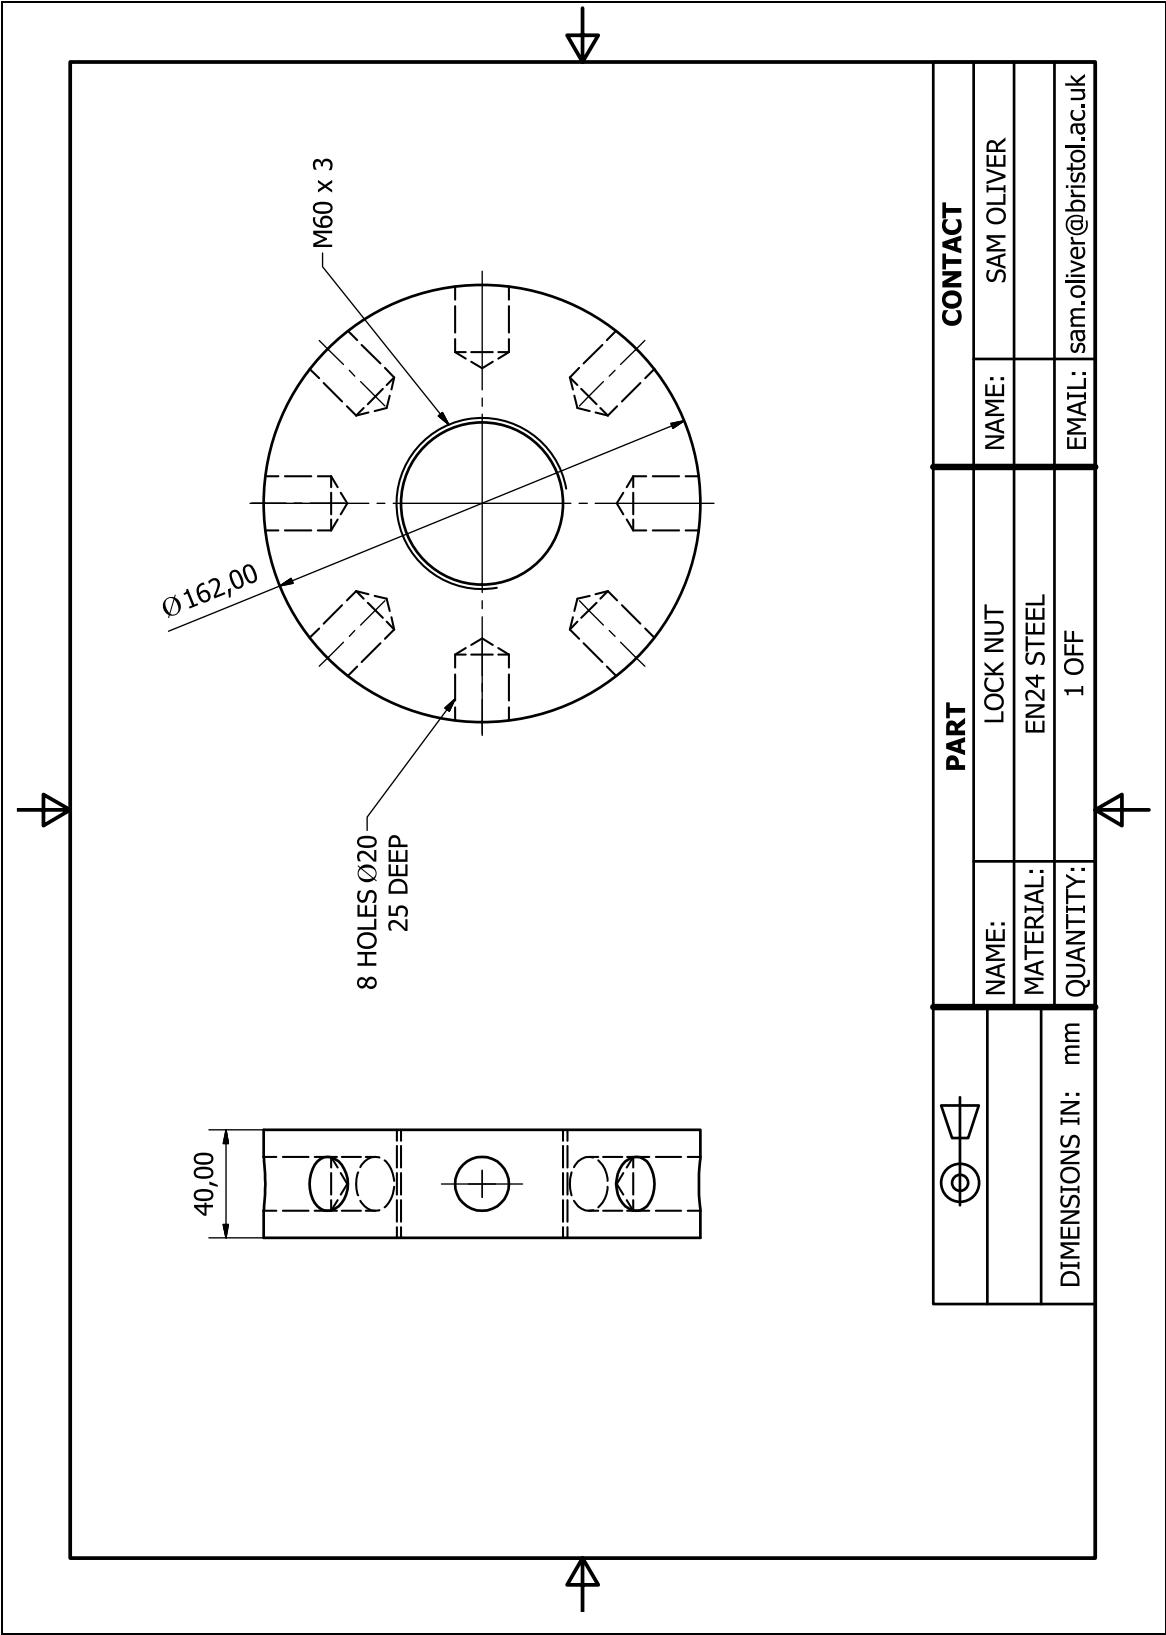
Lock nut. The eight axial holes were reamed for a sliding fit with 20 mm silver steel bar.
